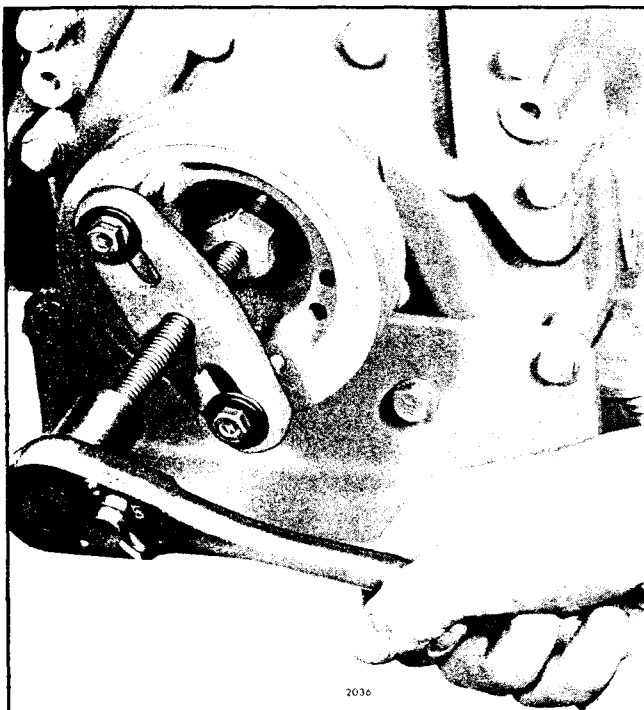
Removing Crankshaft Pulley Using Puller J 4794-01
